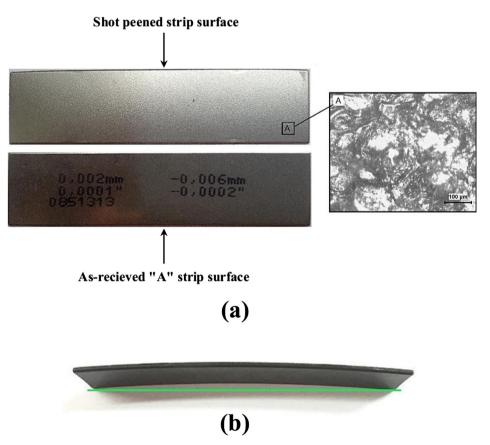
"A" strip (a) dimensions and tolerances before and after shot peening and (b) created arc height (deflection) after shot peening.
